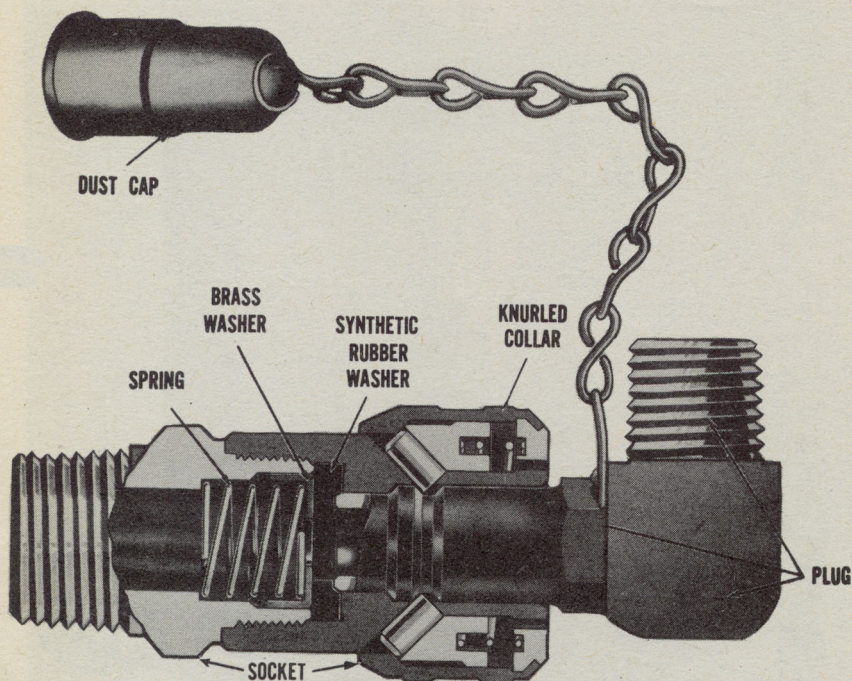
(Added.) Cutaway view of socket and plug. Disassembly is permitted only as directed in paragraph 66.1.
